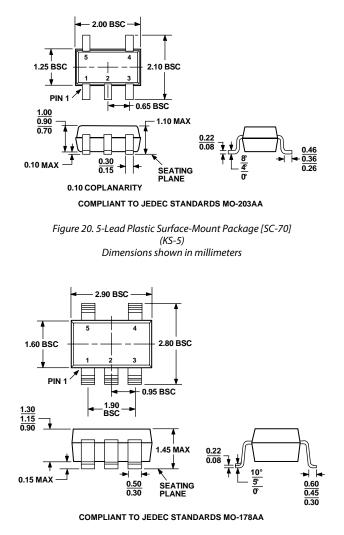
5-Lead Small Outline Transistor Package [SOT-23] (RJ-5) Dimensions shown in millimeters
